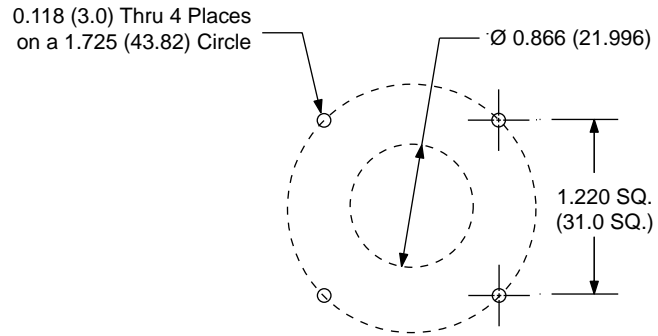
Mdrive Microstepping mounting and drill pattern
